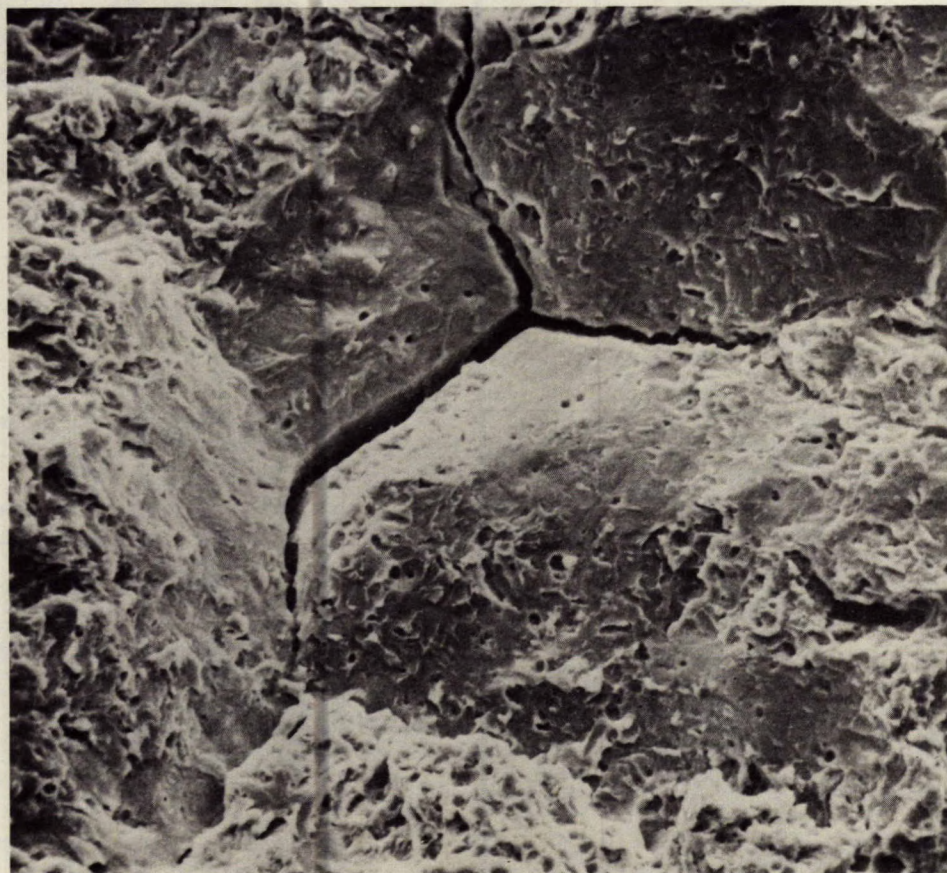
Scanning electron microscope photograph of part of the environmental cracking zone of T-1 weld specimen 14 showing intergranular cracking. (X1100)
